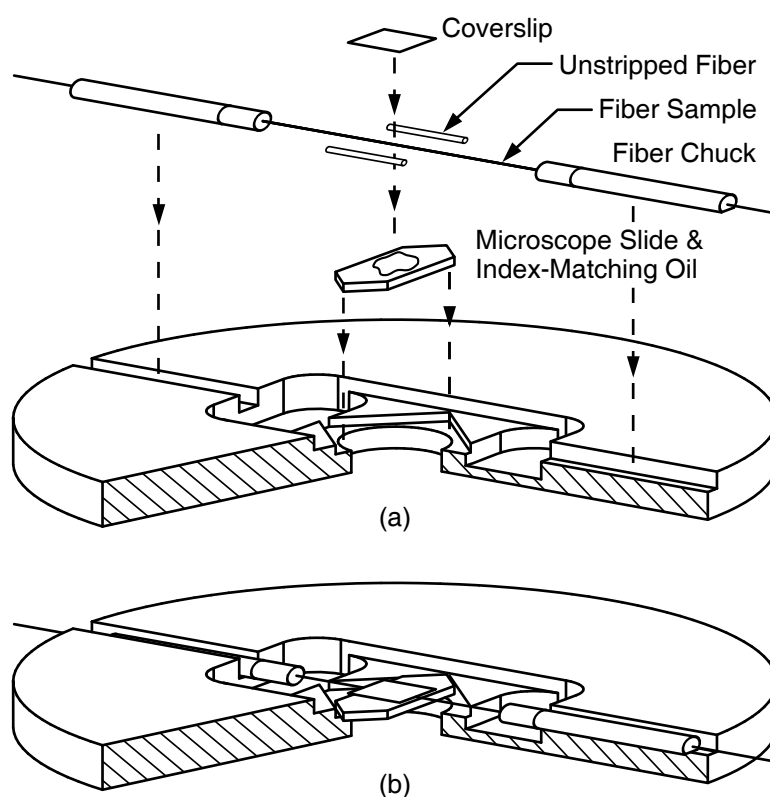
Custom microscope stage plate configuration: (a) expanded view showing the placement of the coverslip, fiber sample, coated fiber spacers, index-matching oil, and microscope slide; and (b) assembled view showing the arrangement of the components within the stage plate.
